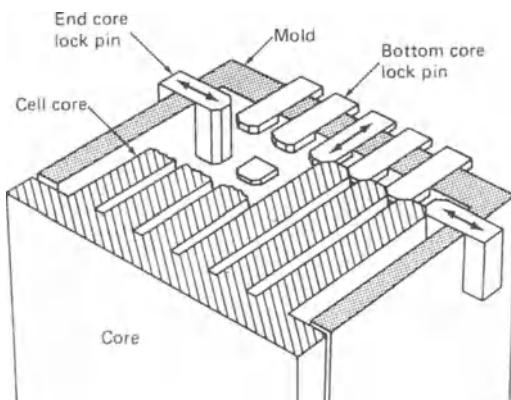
Schematic of mold with side-core actions (battery case molded of PP).
